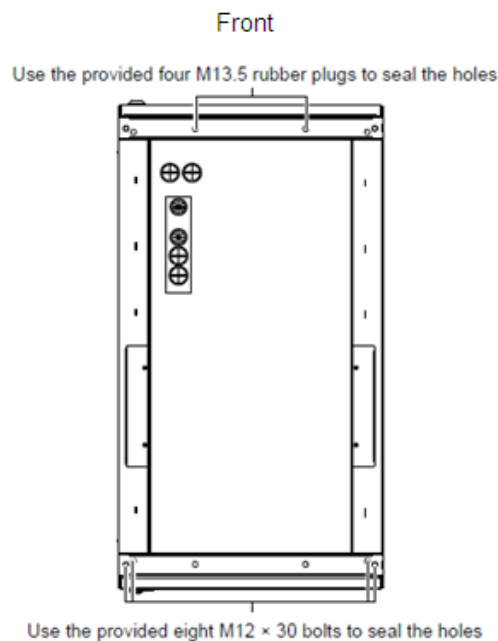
Blocking the holes on the top of the cabinet (Top view)
